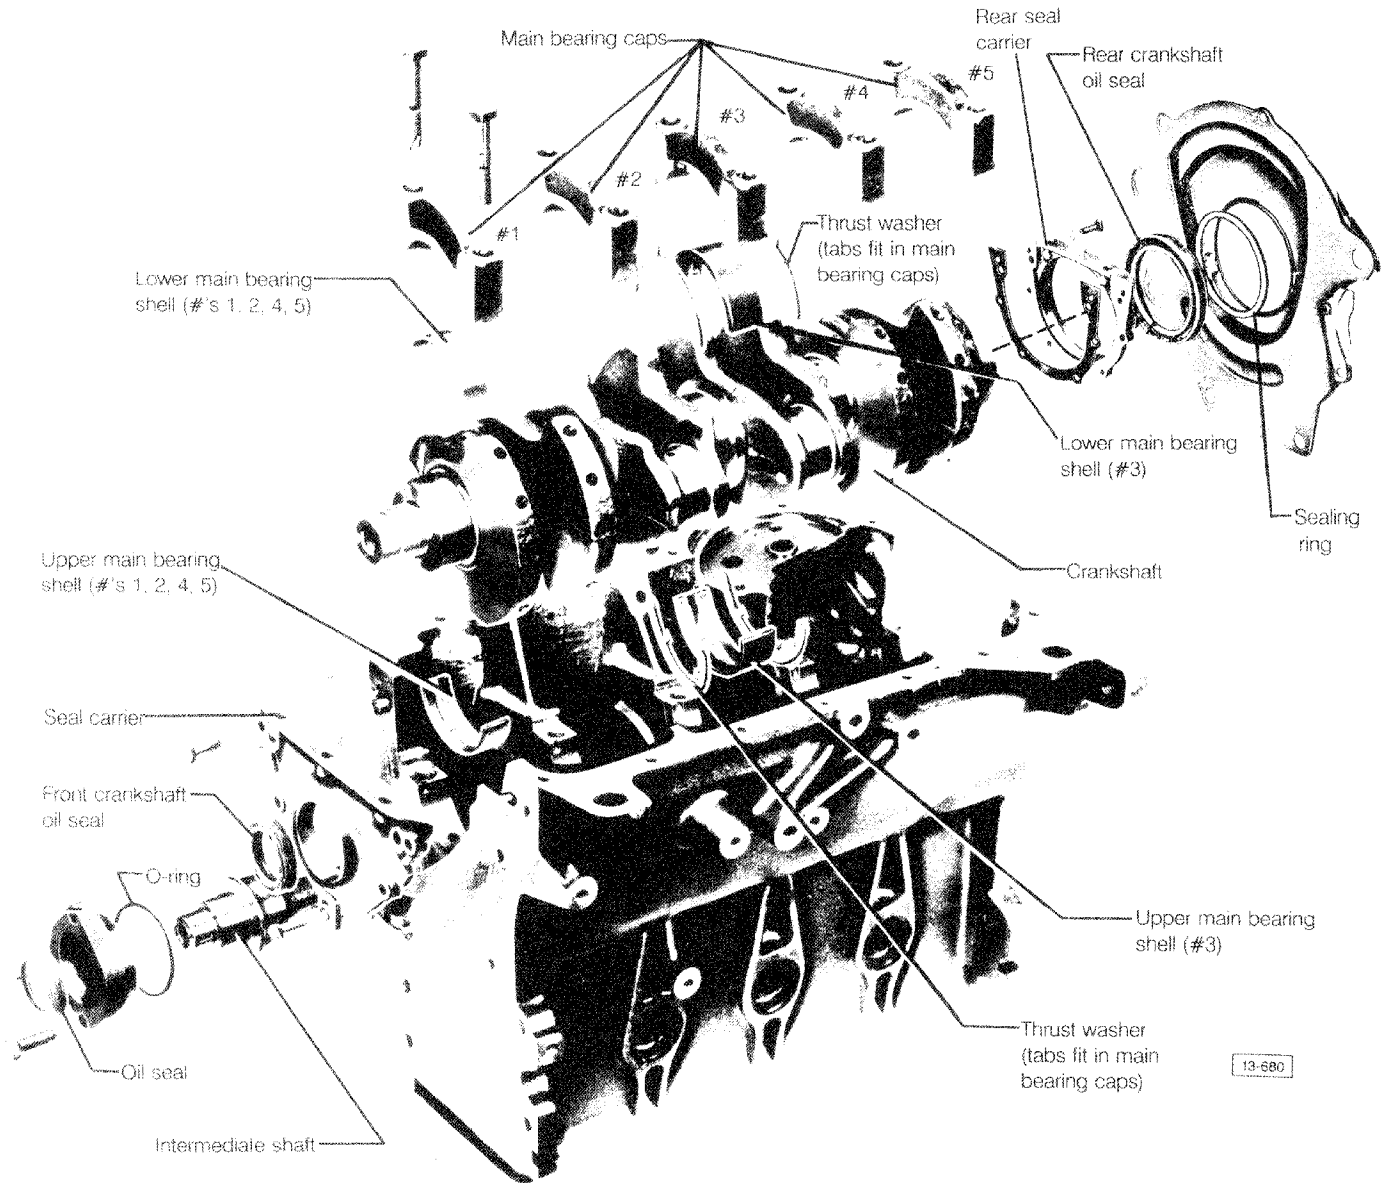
Exploded view of cylinder block, crankshaft, intermediate shaft, and related parts.
